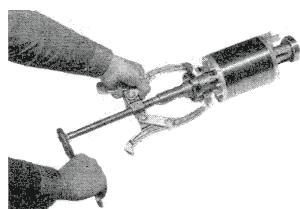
REMOVAL OF BEARINGS WITH A PRESS
